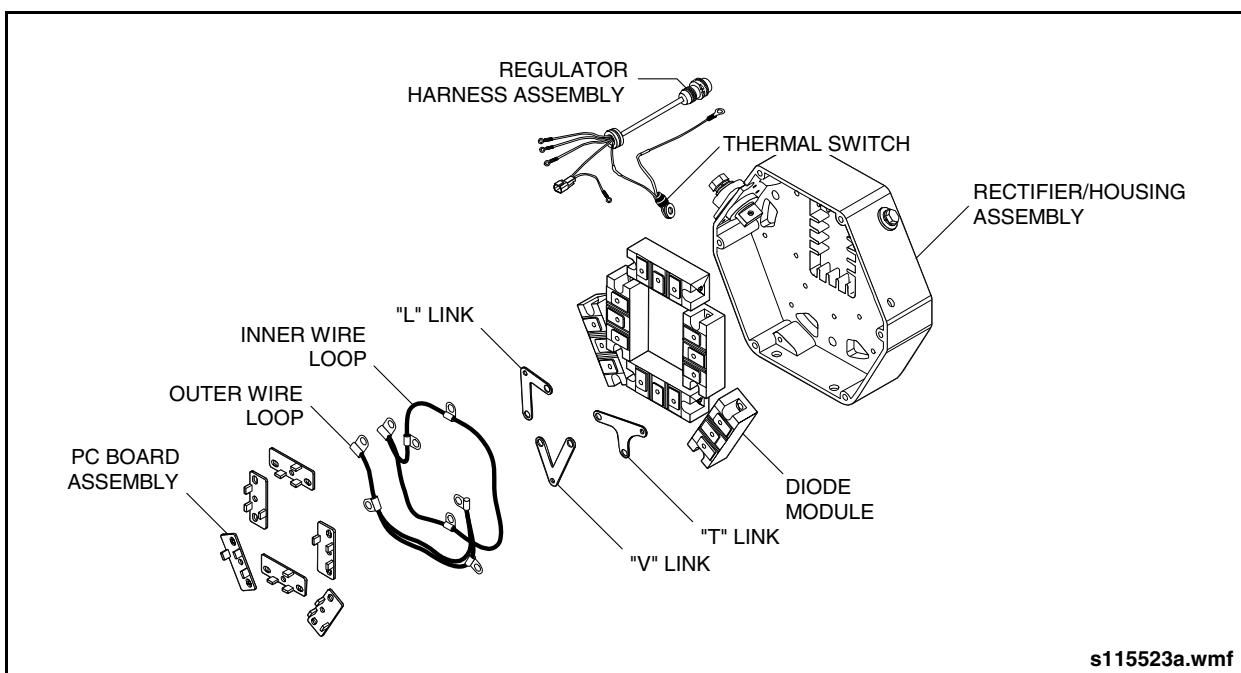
Rectifier/Housing Assembly Component Arrangement
